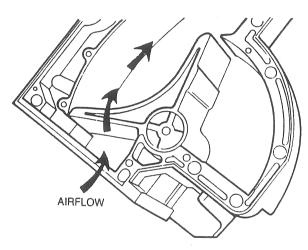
VAF sensor. (Courtesy of Ford Motor Co.)
